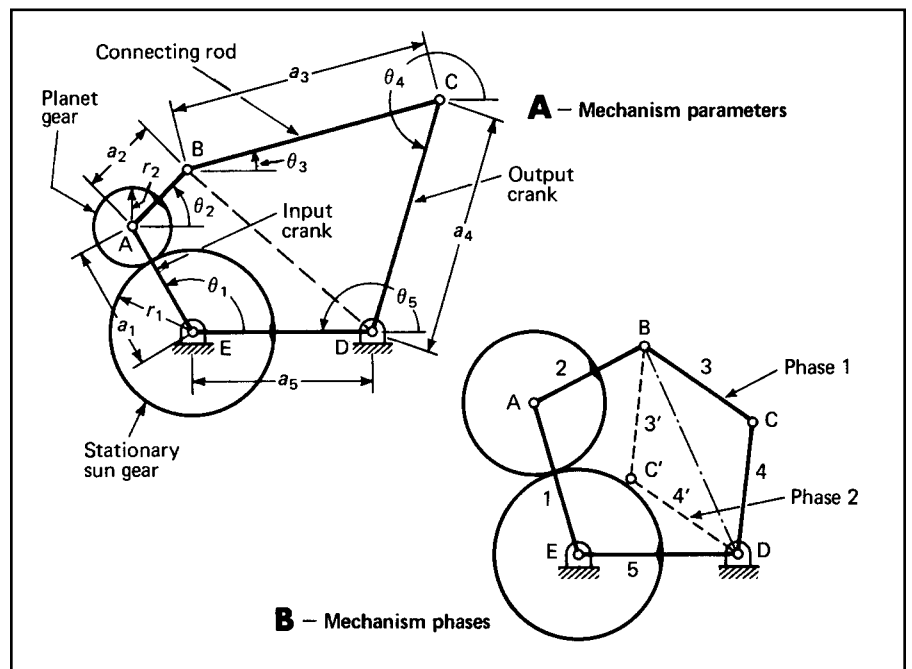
A detailed design of a Type-5 mechanism. The input crank causes the planet gear to revolve around the sun gear, which is always stationary.
